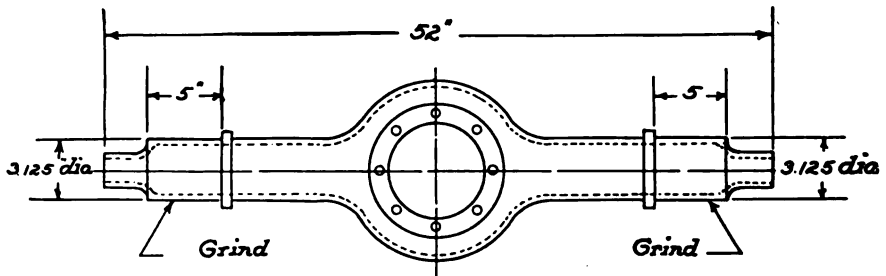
shows a pressed steel rear-axle housing $\frac{1}{4}$ -inch thick. There are four diameters to be ground with a limit of .002-.040-inch stock removed (from black stock).
